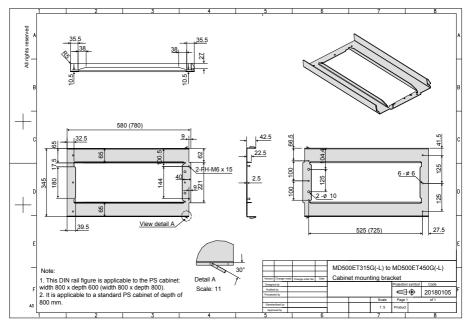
Dimensions of mounting bracket of MD500ET315G(-L) to MD500ET450G(-L) (factory standard)
